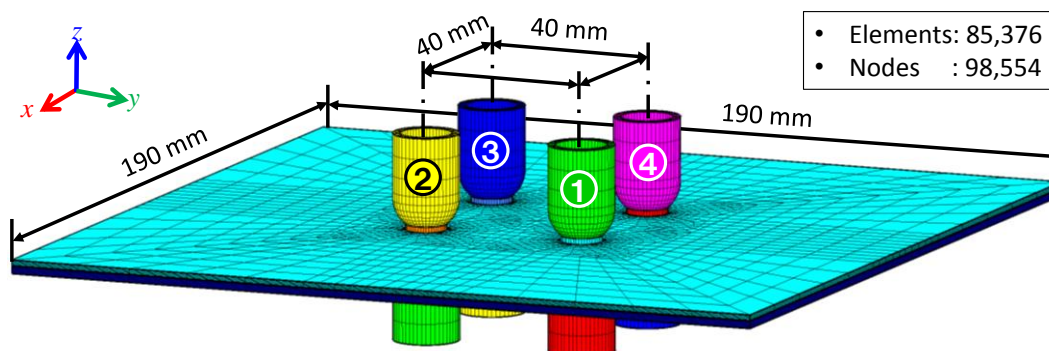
Analysis model of 4 points spot welding.
